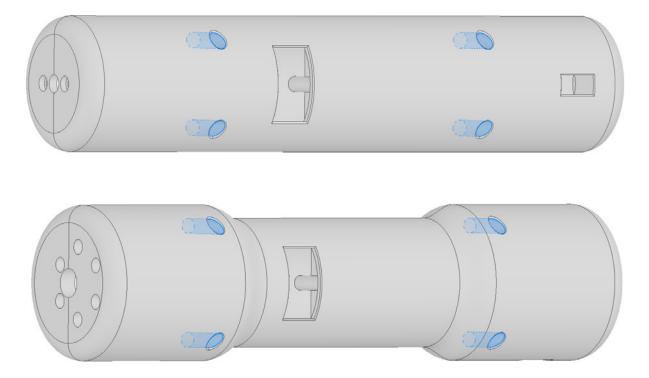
Handle assembly mounting boss holes on option A (top) and option B (bottom) handles
